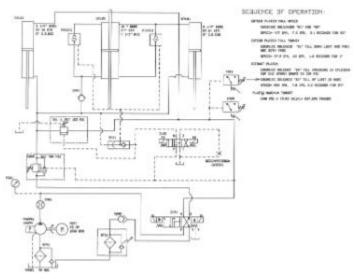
Circuit for 100-ton trim press. Shown with platen retracting at high speed. Select figure to enlarge.
